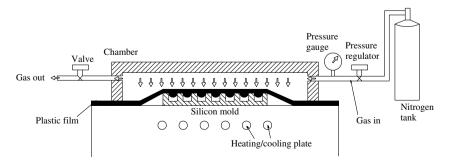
Schematic showing the gas-assisted micro-hot-embossing machine.
